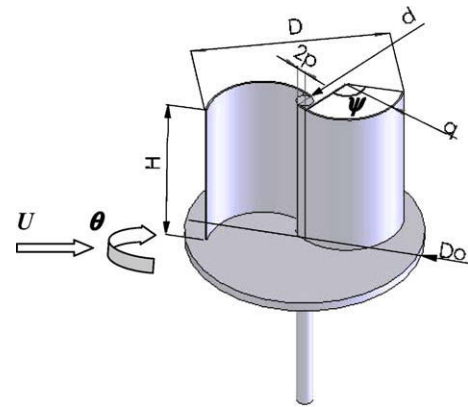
Geometrical parameters of optimized modified Savonius rotor with shaft [2].
